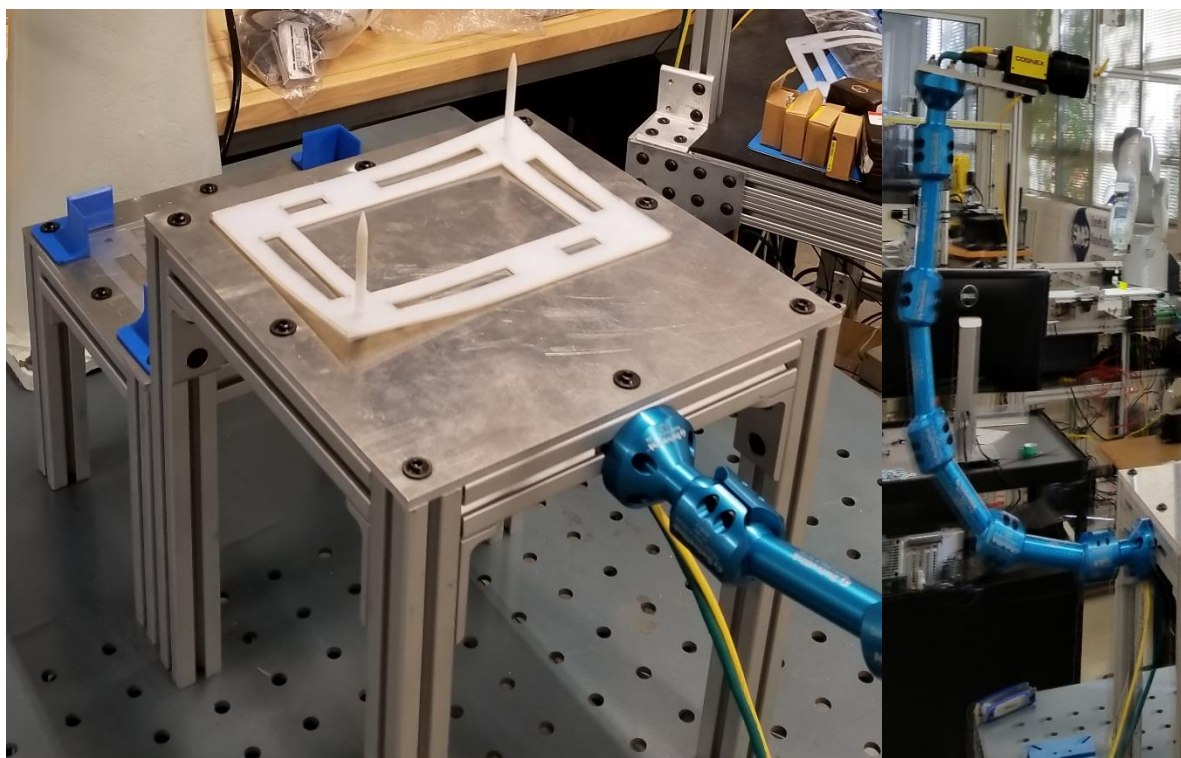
Gasket staging and alignment tables (left) and Swivelink® camera mount (right). The work holding parts in the top left of the left image are 3D printed using ABS.
